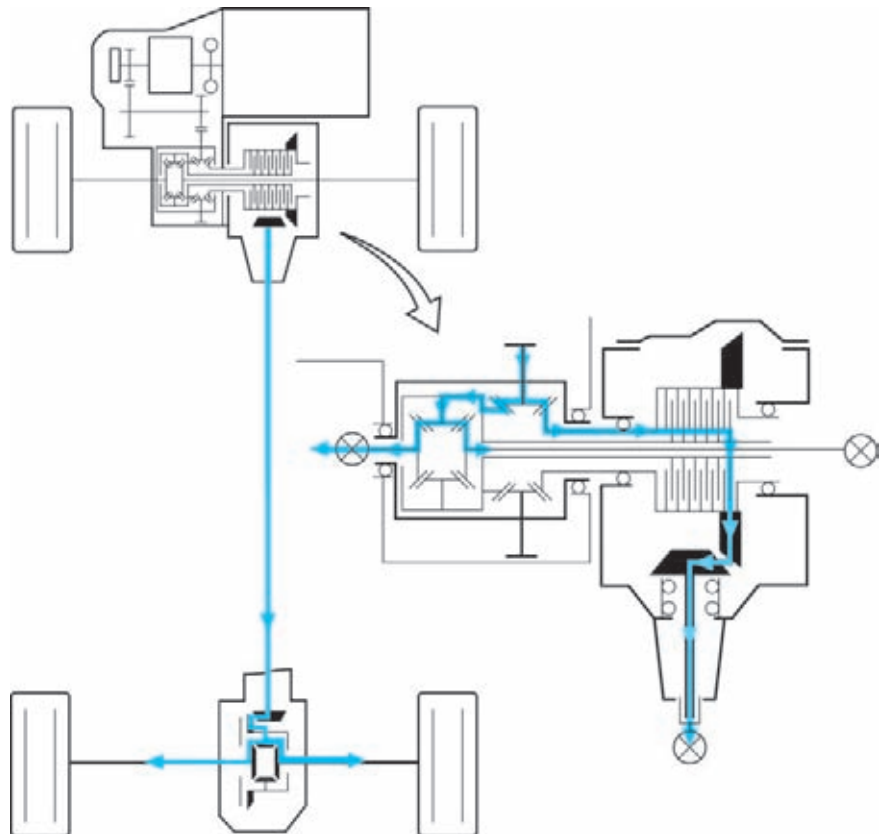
This PTU has an inter axle differential that drives the front axle differential and the transfer gears to the rear drive shaft. The multiplate clutch in the PTU can also transfer power to the transfer gears. (Courtesy of Toyota Motor Sales USA, Inc.)
